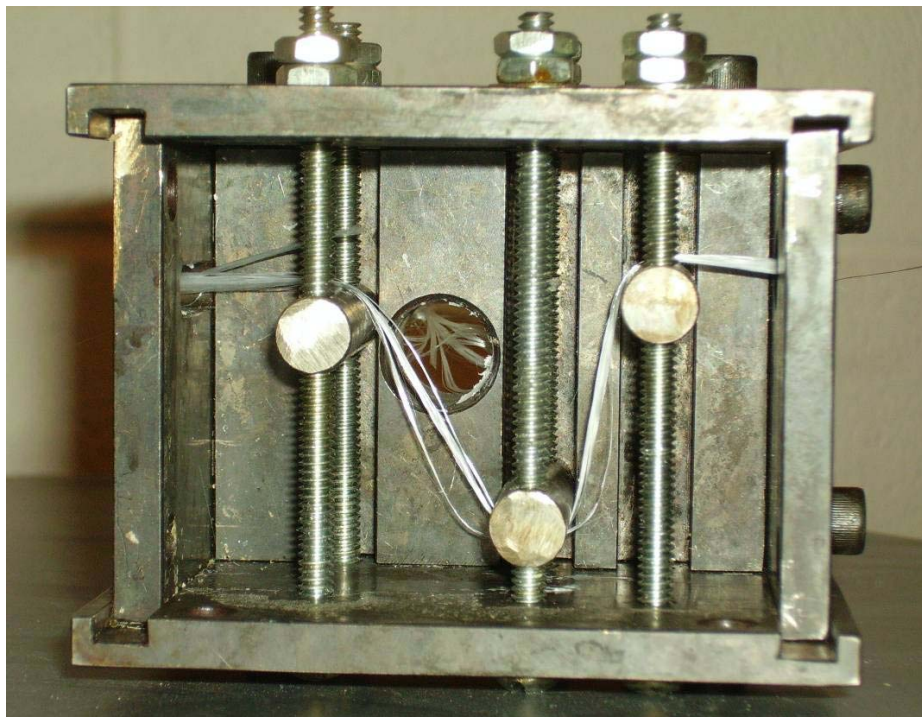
Impregnation tool with side plate removed showing fiber routing.
